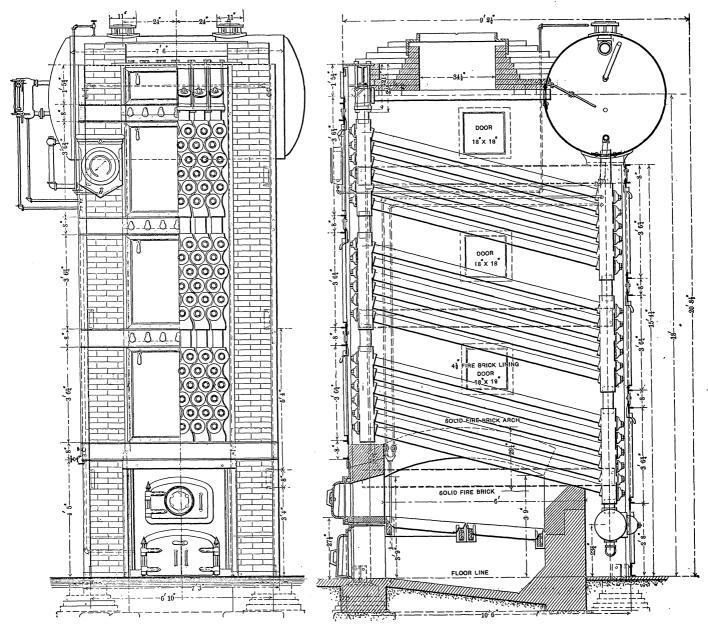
Triple-Deck Babcock & Wilcox Boiler, Utilizing Heat from Scrap Furnace and Billet Furnace.—N. E. Ayer & Co.'s Rolling Mill, Portland, Oregon.
